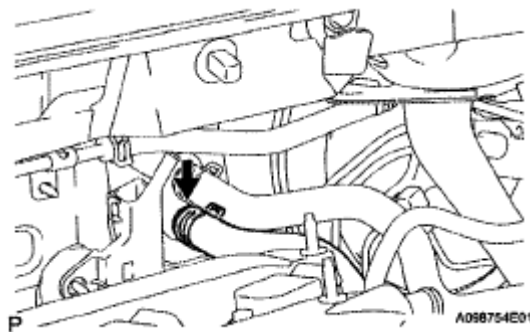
Locating Heater Water Outlet Hose From Air Conditioner Tube
